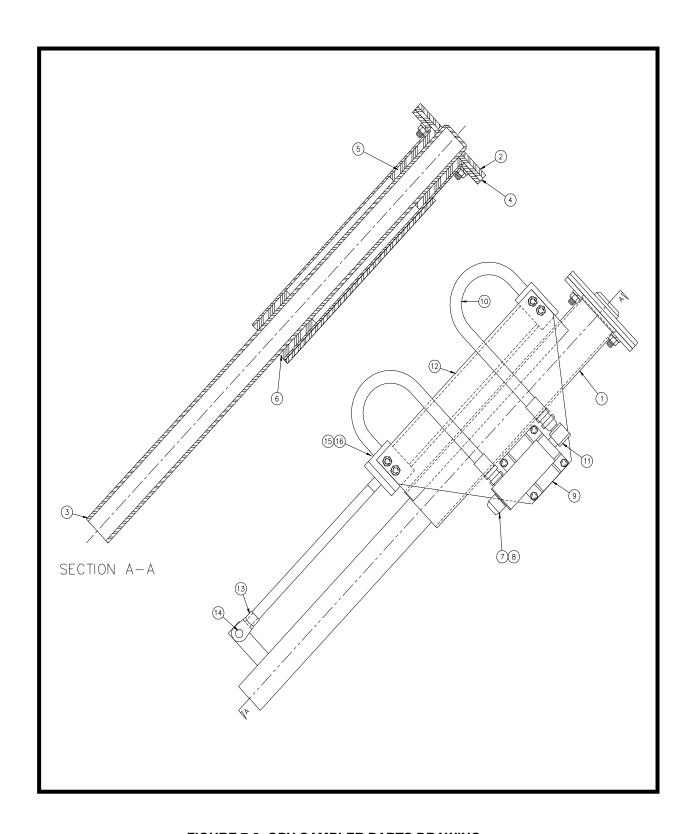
, GPH SAMPLER PARTS DRAWING
